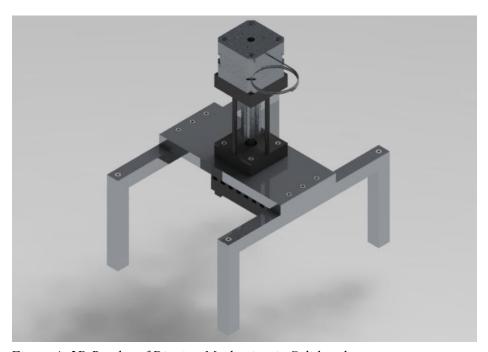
3D Render of Dipping Mechanism in Solidworks
